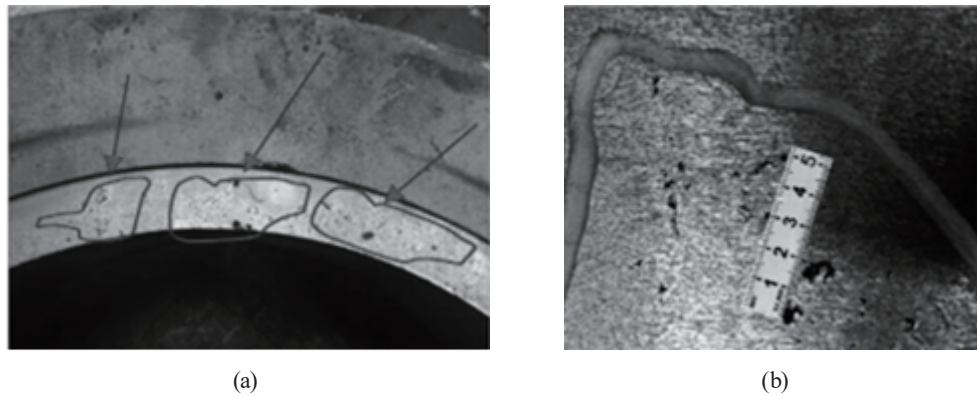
Crack location maps. (a) Bearing seat crack and (b) crack development diagram.
